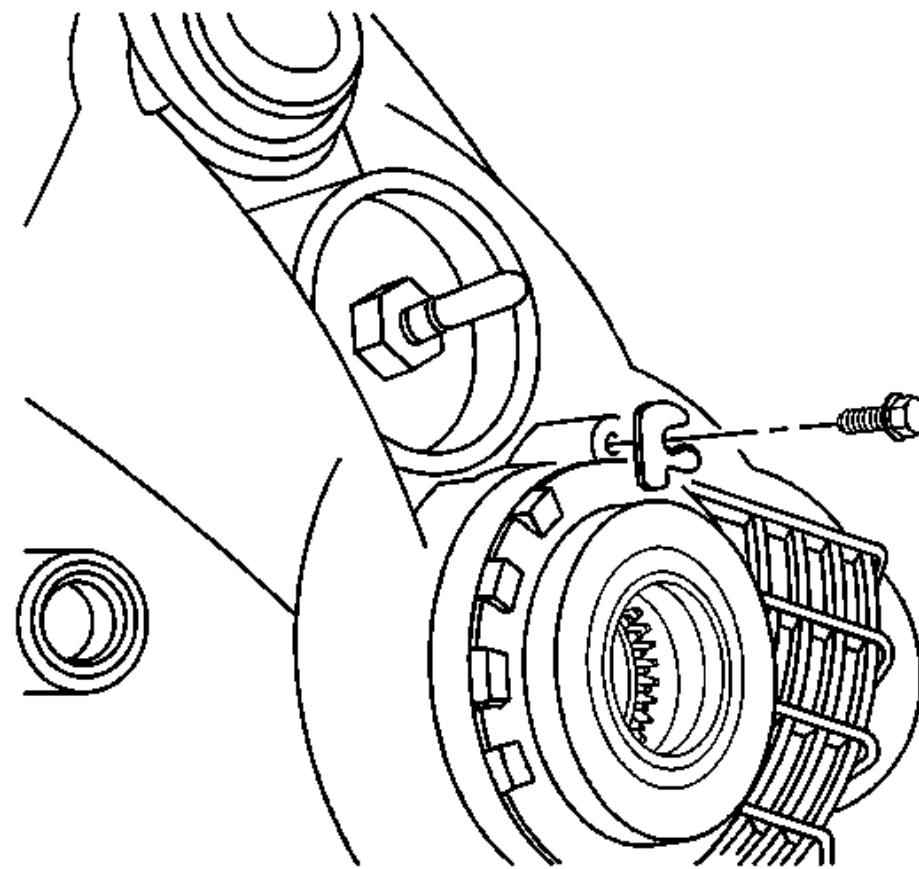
Left Side Differential Bearing Adjuster Nut Lock & Bolt
